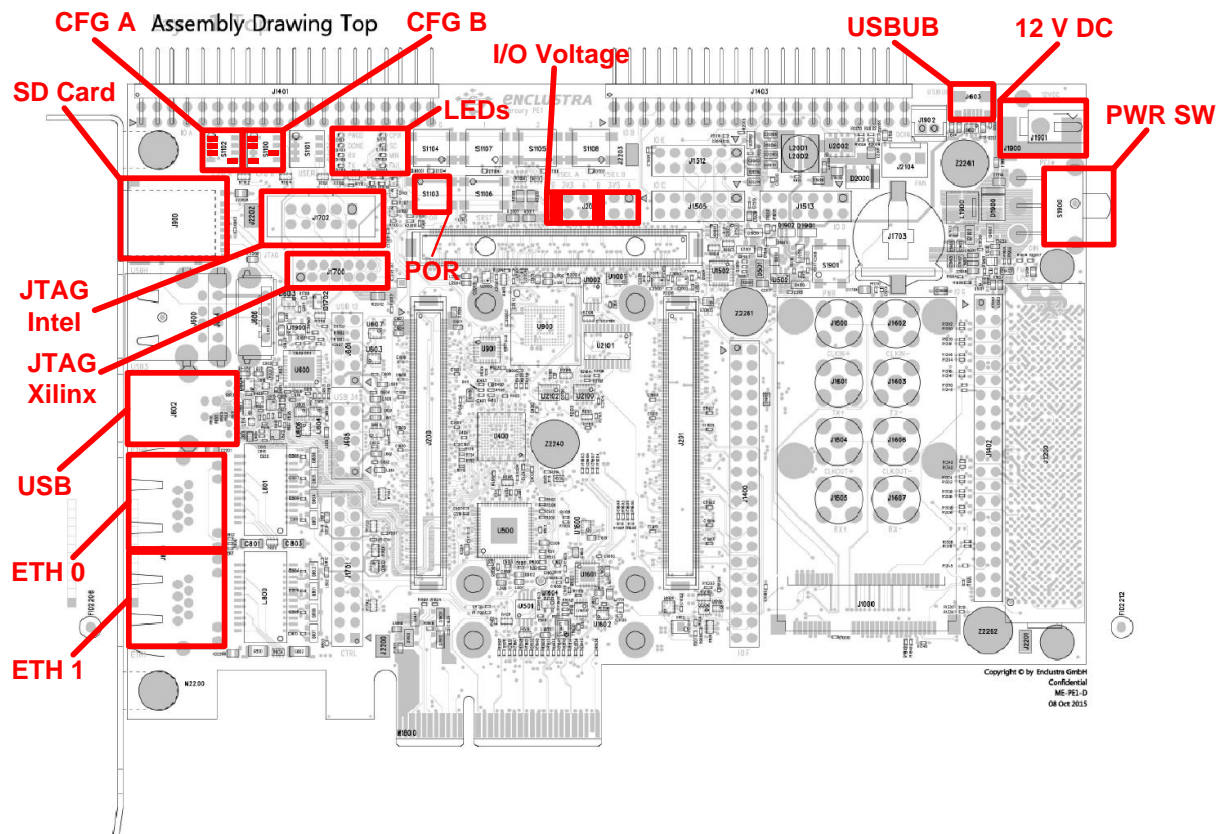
Mercury+ PE1 Base Board Assembly Drawing (Top View)
